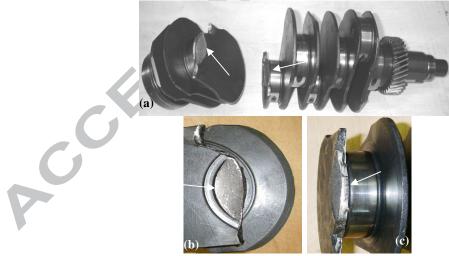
(a) Failed crankshaft showing the morphology of the surface crack; (b) and (c) the crack initiation sites at crankweb No. 6.
